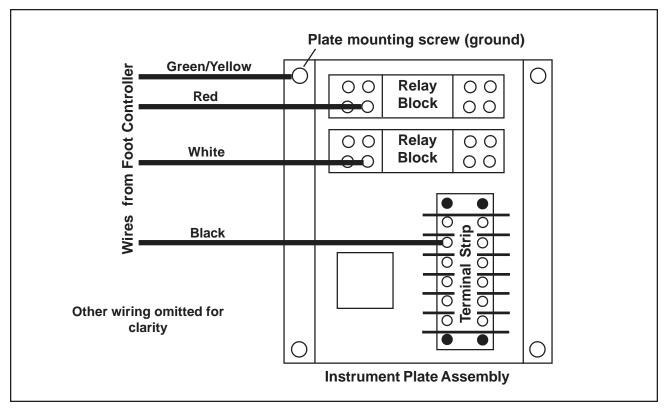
Foot Controller Wire Connections to the Instrument Plate Assembly
